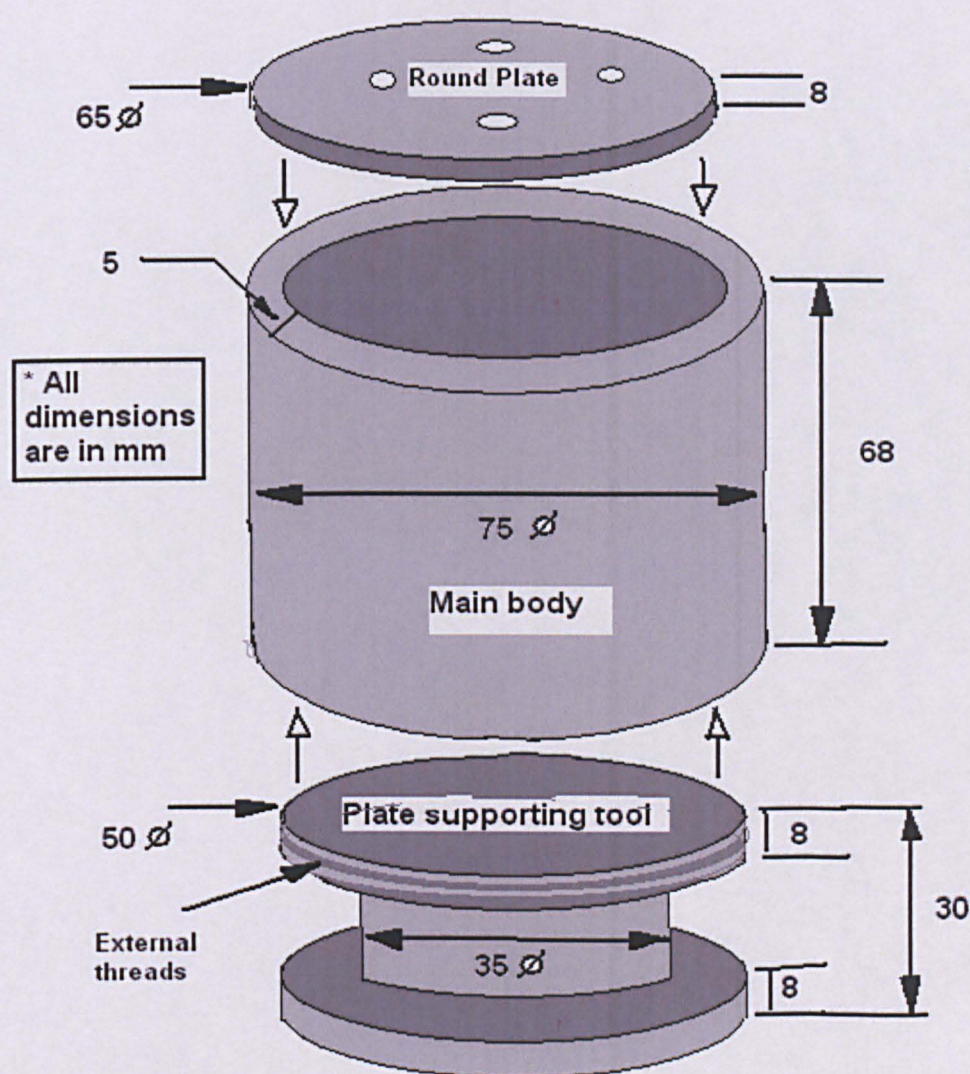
Schematic diagram of the spinal vertebrae holding tool including all three parts and necessary dimensions.
